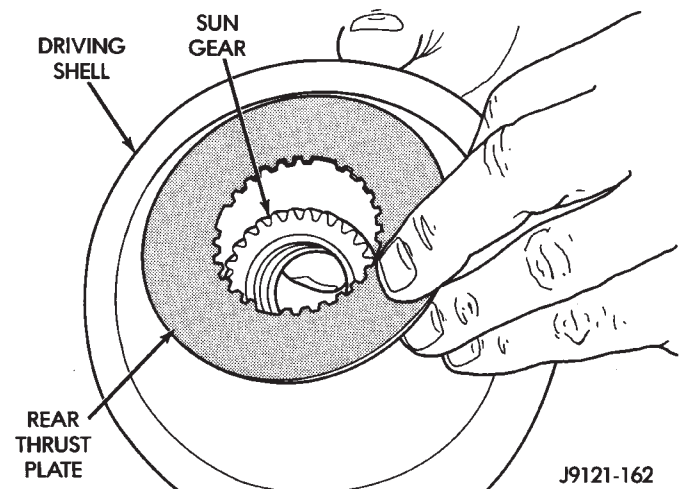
Installing Sun Gear And Rear Thrust Plate In Driving Shell
